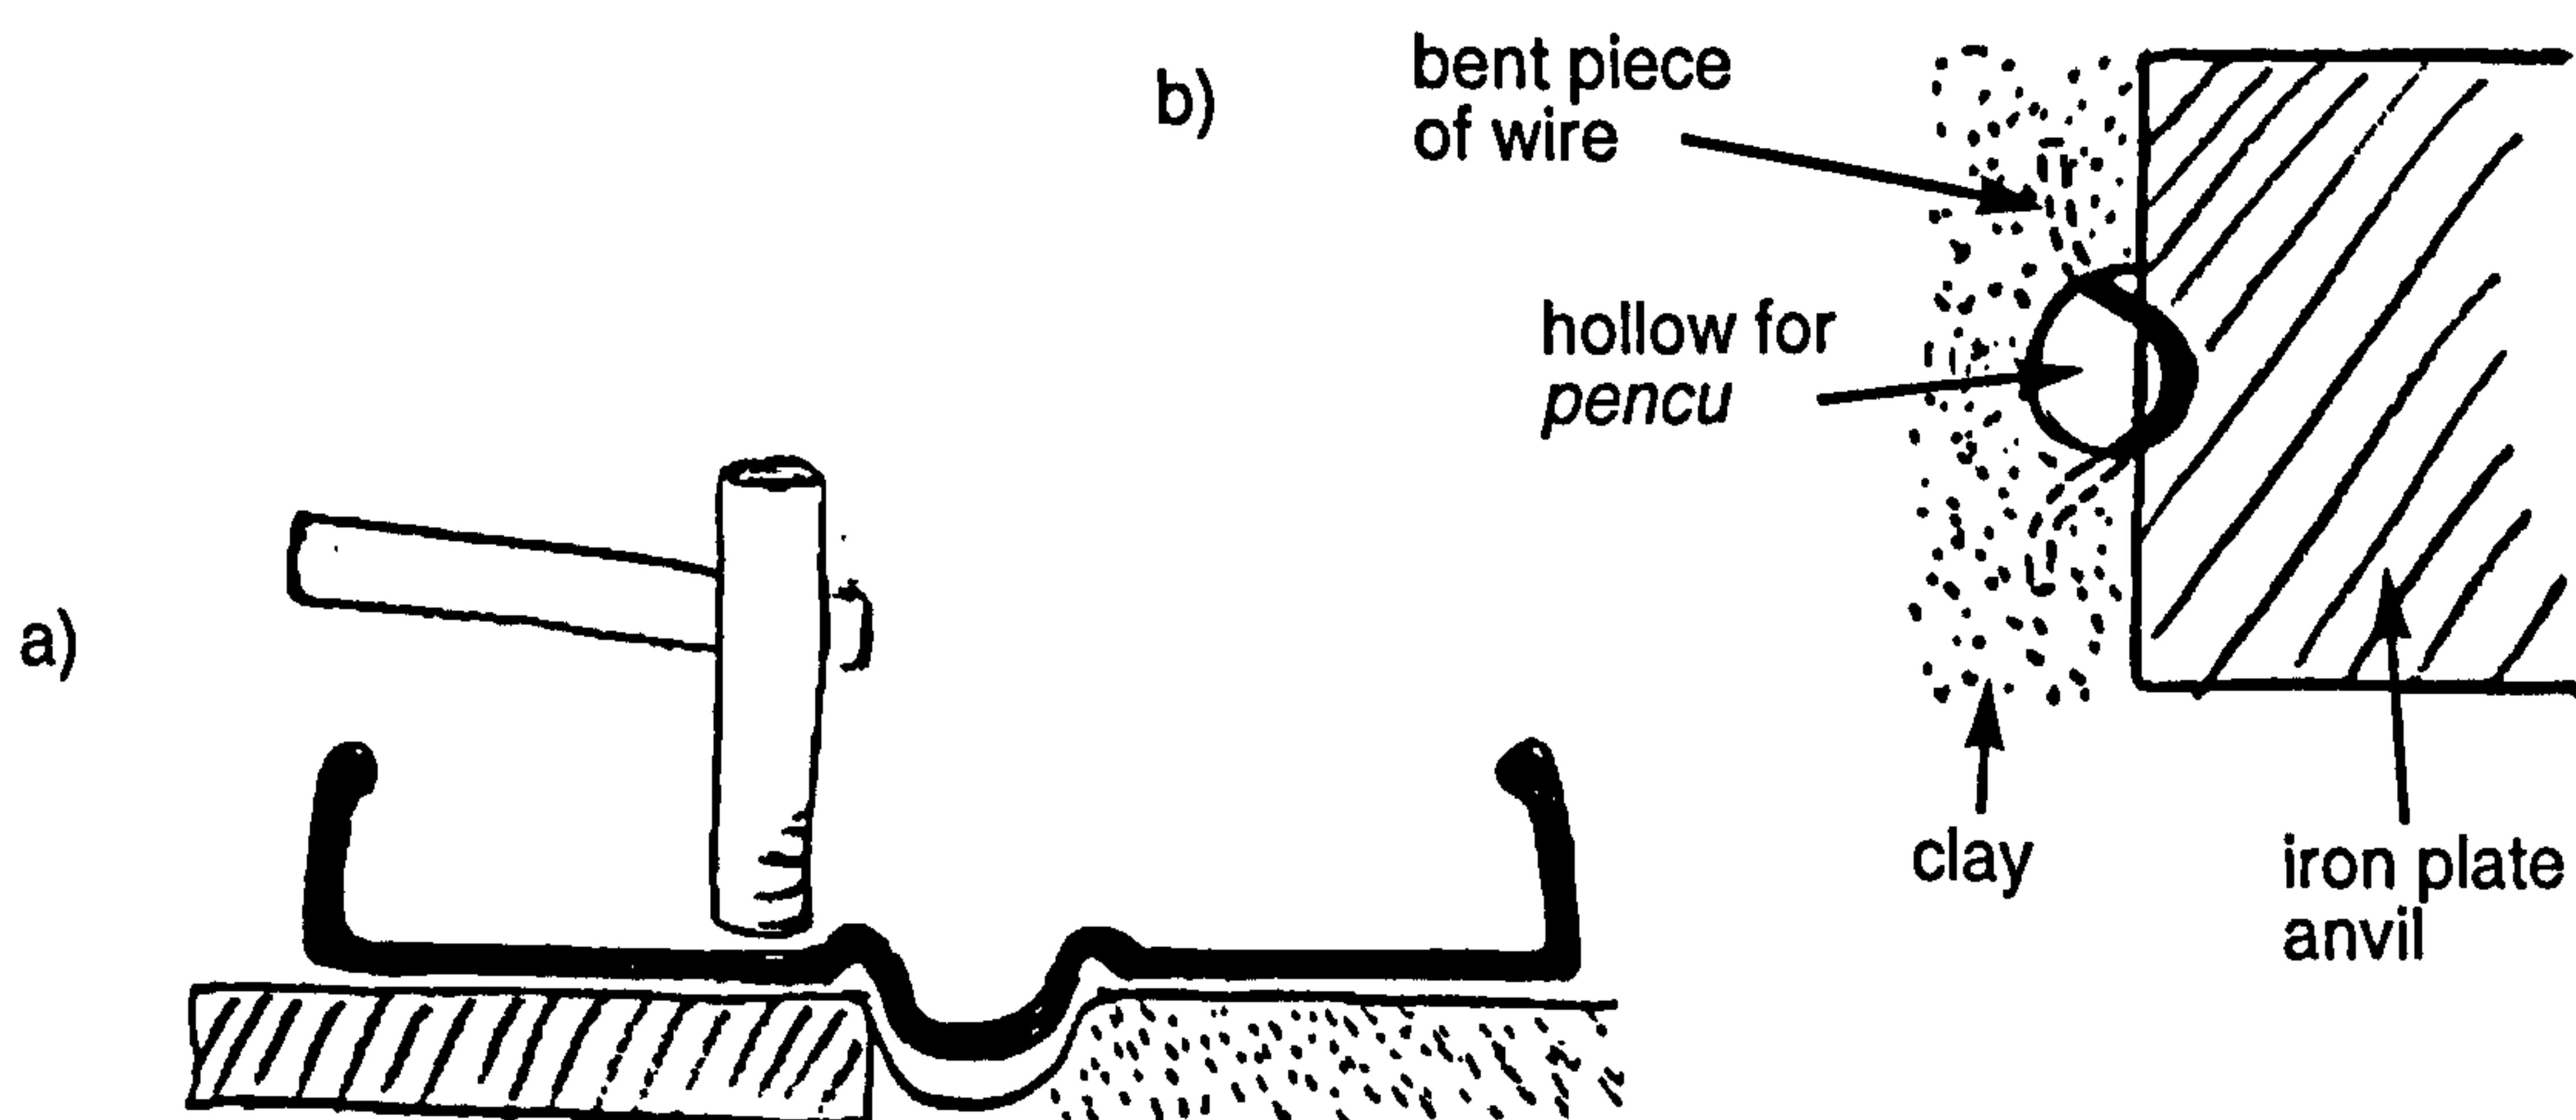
Making the *widengan*, a) elevation, and b) plan of anvil.
